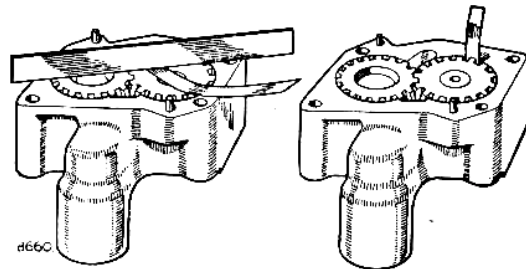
Checking clearance of oil pump gears, Petrol models.
